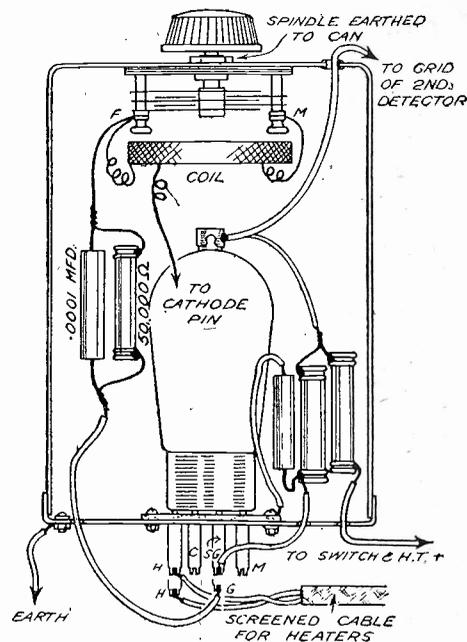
Proposed method of mounting valve and components inside a coil-screening can.
